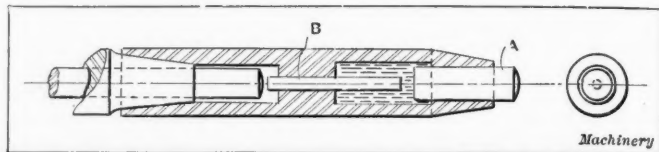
A Multiplying Attachment for the Indicator shown in Fig. 2
